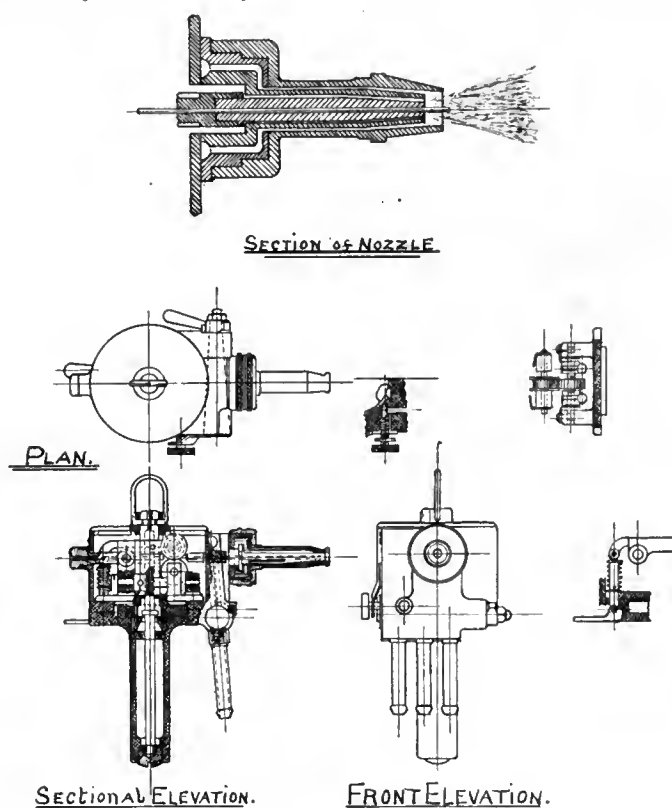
DETAILS OF PISTOL CONSTRUCTION.
